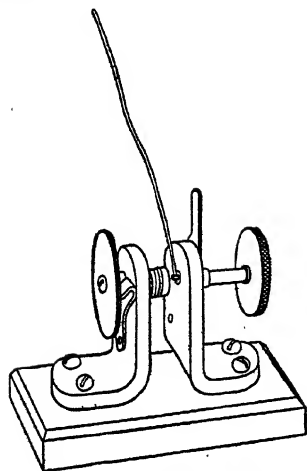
Inserting the wire end in the split mandrel of the coiling machine
